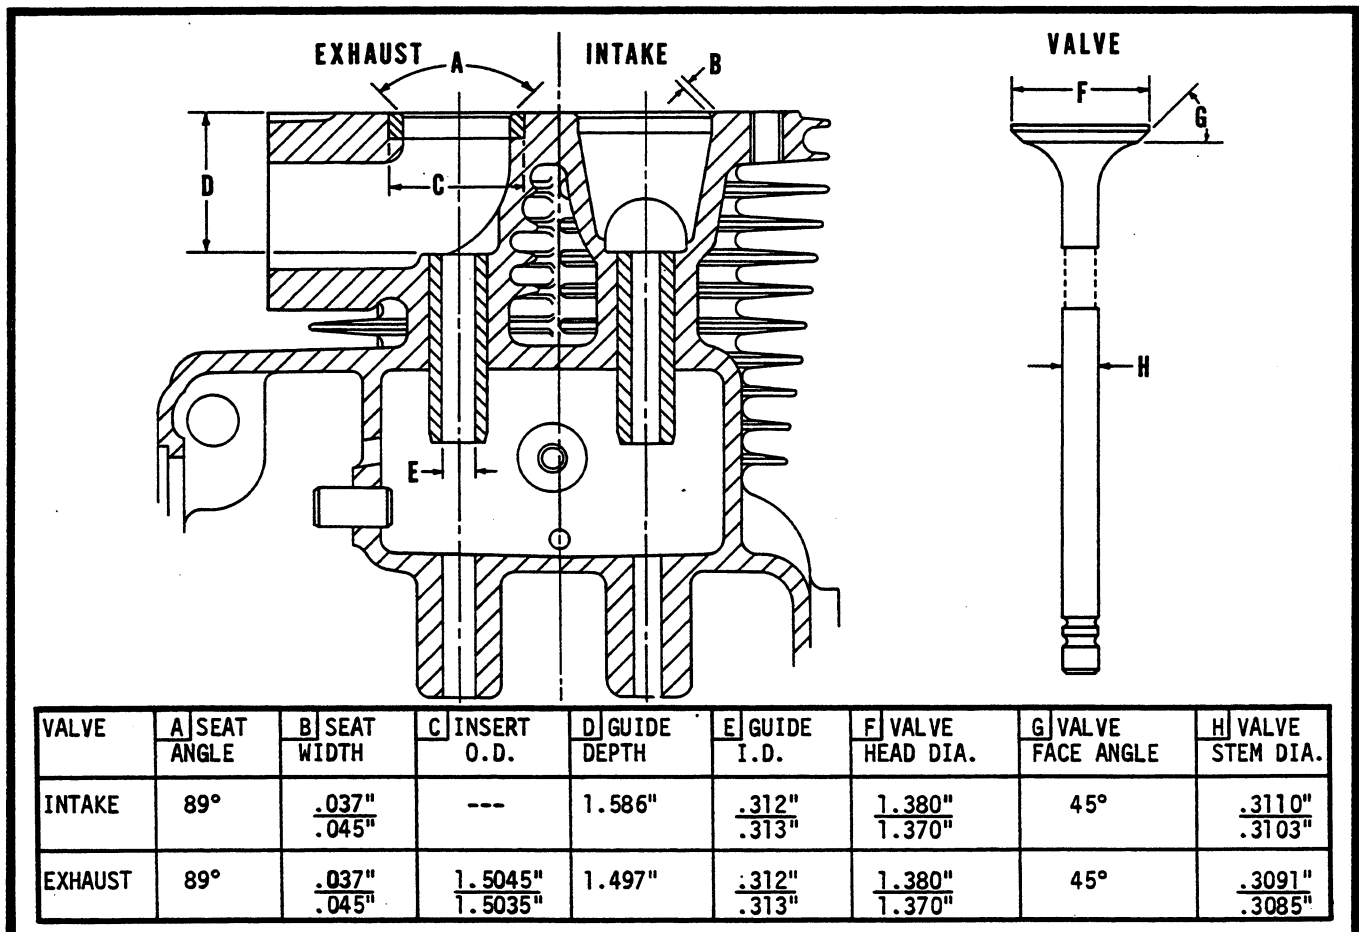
VALVE PORT SPECIFICATIONS
